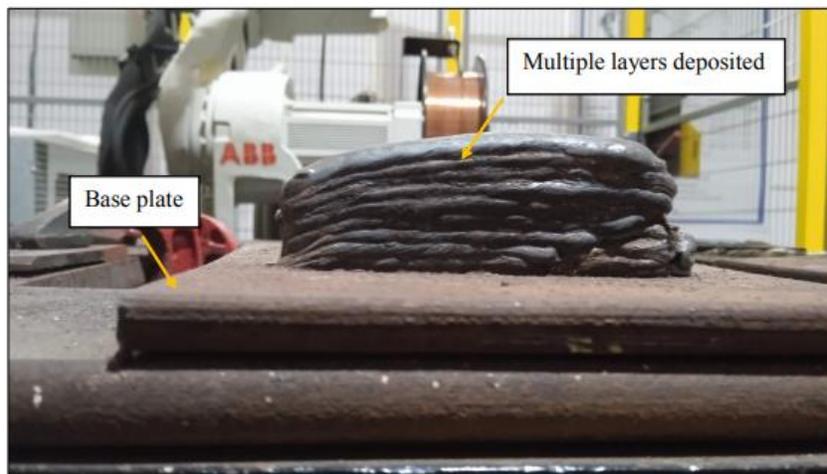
Layer-by-layer Deposition of Weld Bead Towards a Thin Wall
